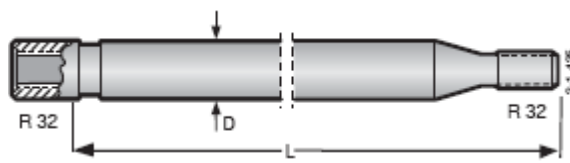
Carburized guide tube (Top Hammer Drilling Tools Product Catalog).
